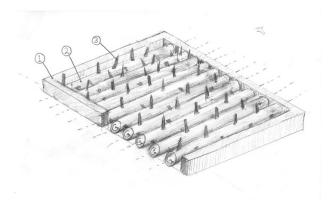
Sketch of Shaft Conveyor and Parts List.
